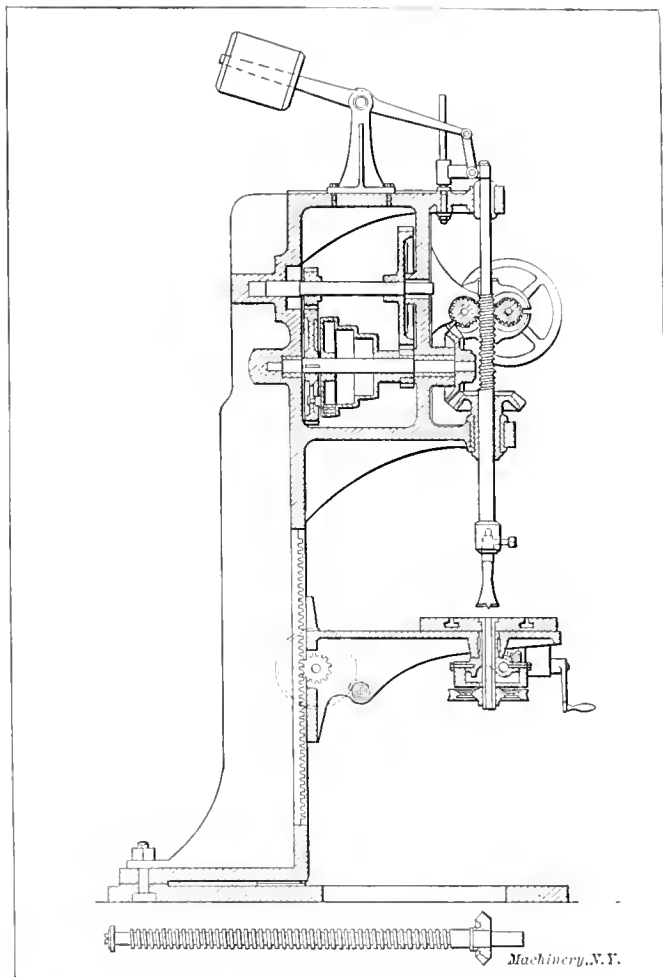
Vertical Drilling Machine with Screw Feed and Worms Joseph Whitworth & Co. (About 1846)
